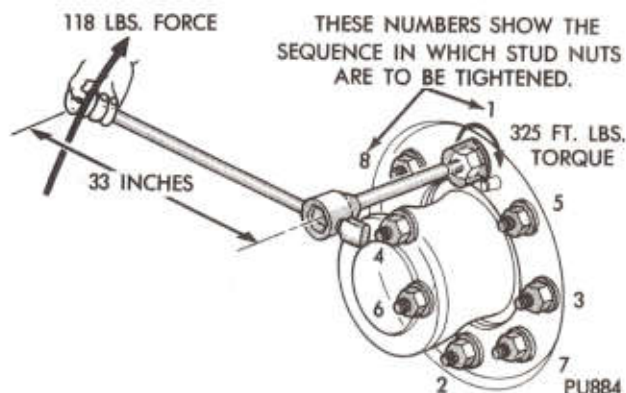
Eight-Stud Dual Rear Wheel Tightening Sequence
